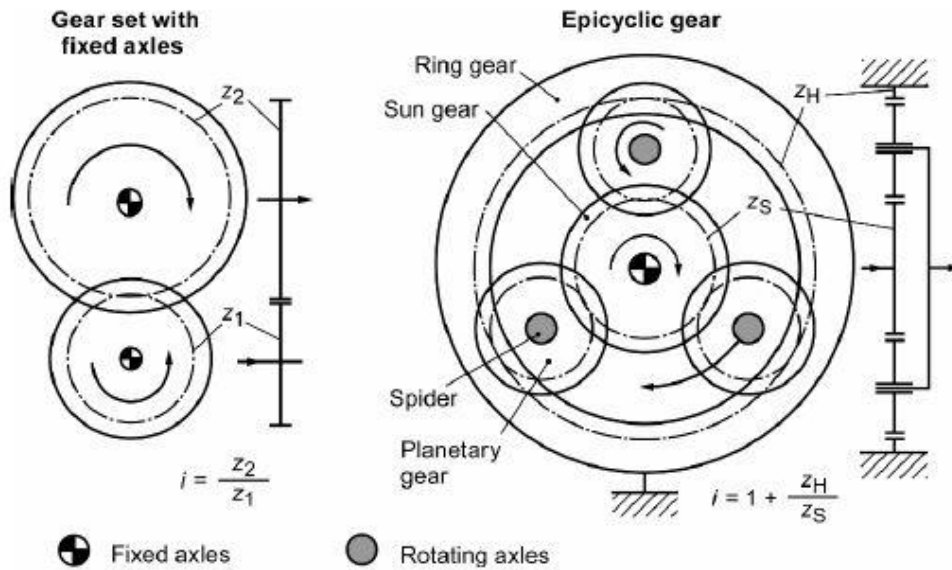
Gear set with fixed axes and epicyclic gear (Naunheimer *et al.*, 2010)
